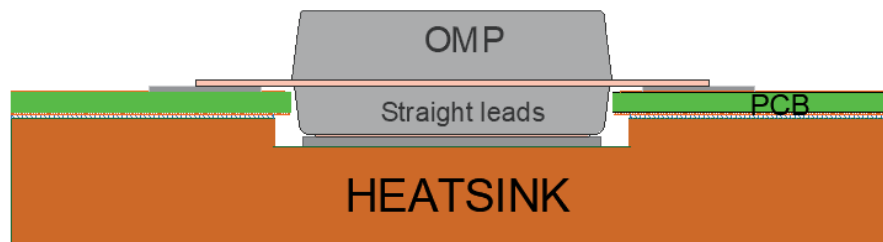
PCB bonded to a heat sink with a cavity, intended for straight leads package
